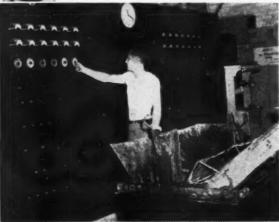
Jig-conveyor setup for polishing automobile bumpers.
